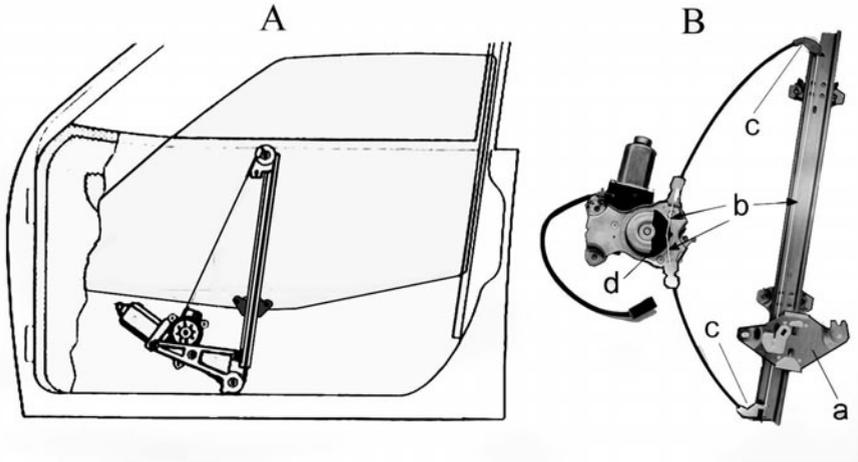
Example of installation (A) and single drive wire regulator details (B); a: sliding plate; b: wire rope; c: connecting pipes; d: drum and motor.
